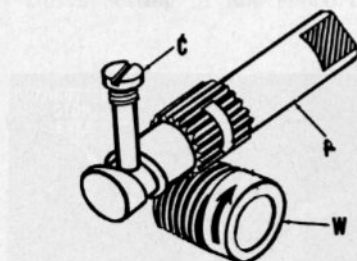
View showing operation of automatic chain oiler pump. Worm (W) mounted on crankshaft or sprocket shaft turns the plunger (P). As the plunger turns, it is moved back and forth by the cam groove cut in plunger riding on the cam screw (C). Flat on piston end of plunger acts as inlet and outlet valve as the plunger turns past inlet and outlet ports.
